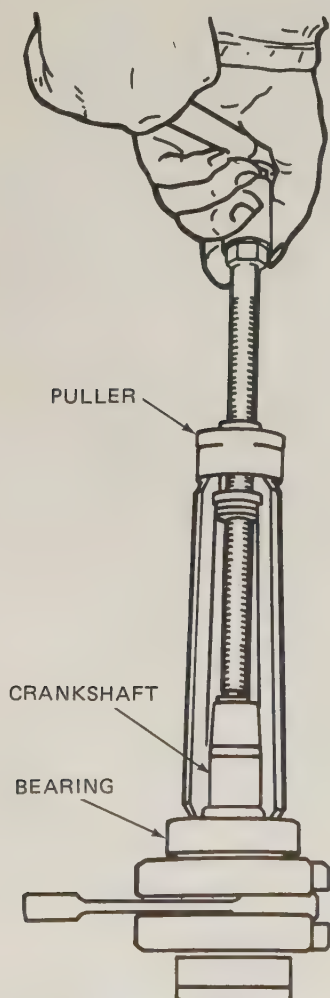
Removing ball bearing from crankshaft with a puller. (Kohler Company)
